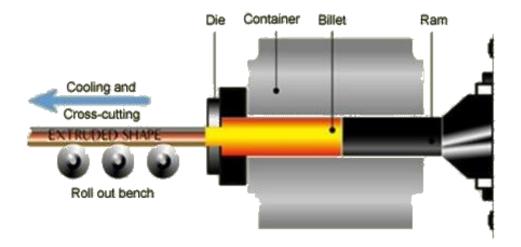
Direct Extrusion – In Finkelstein-casting
